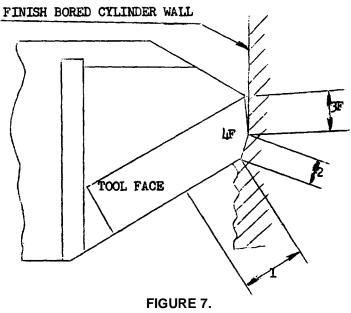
(FINISH BORING TOOL BIT) (IN CUTTING POSITION)
